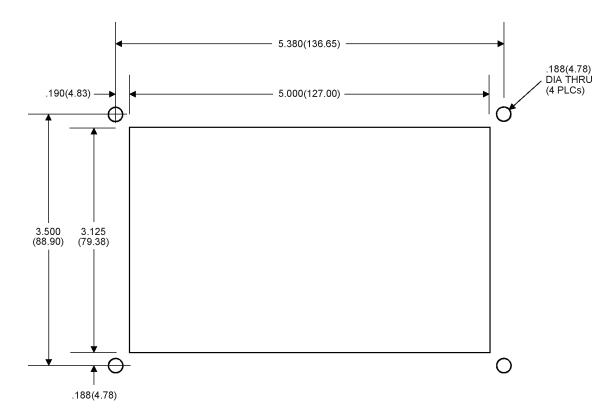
Front Mounted Floppy Cutout Dimensions
